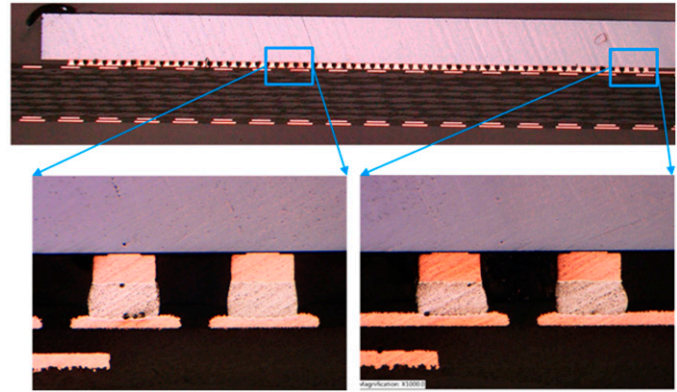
Cross-sectional analysis of 150-µm pitch solder on pad package.
